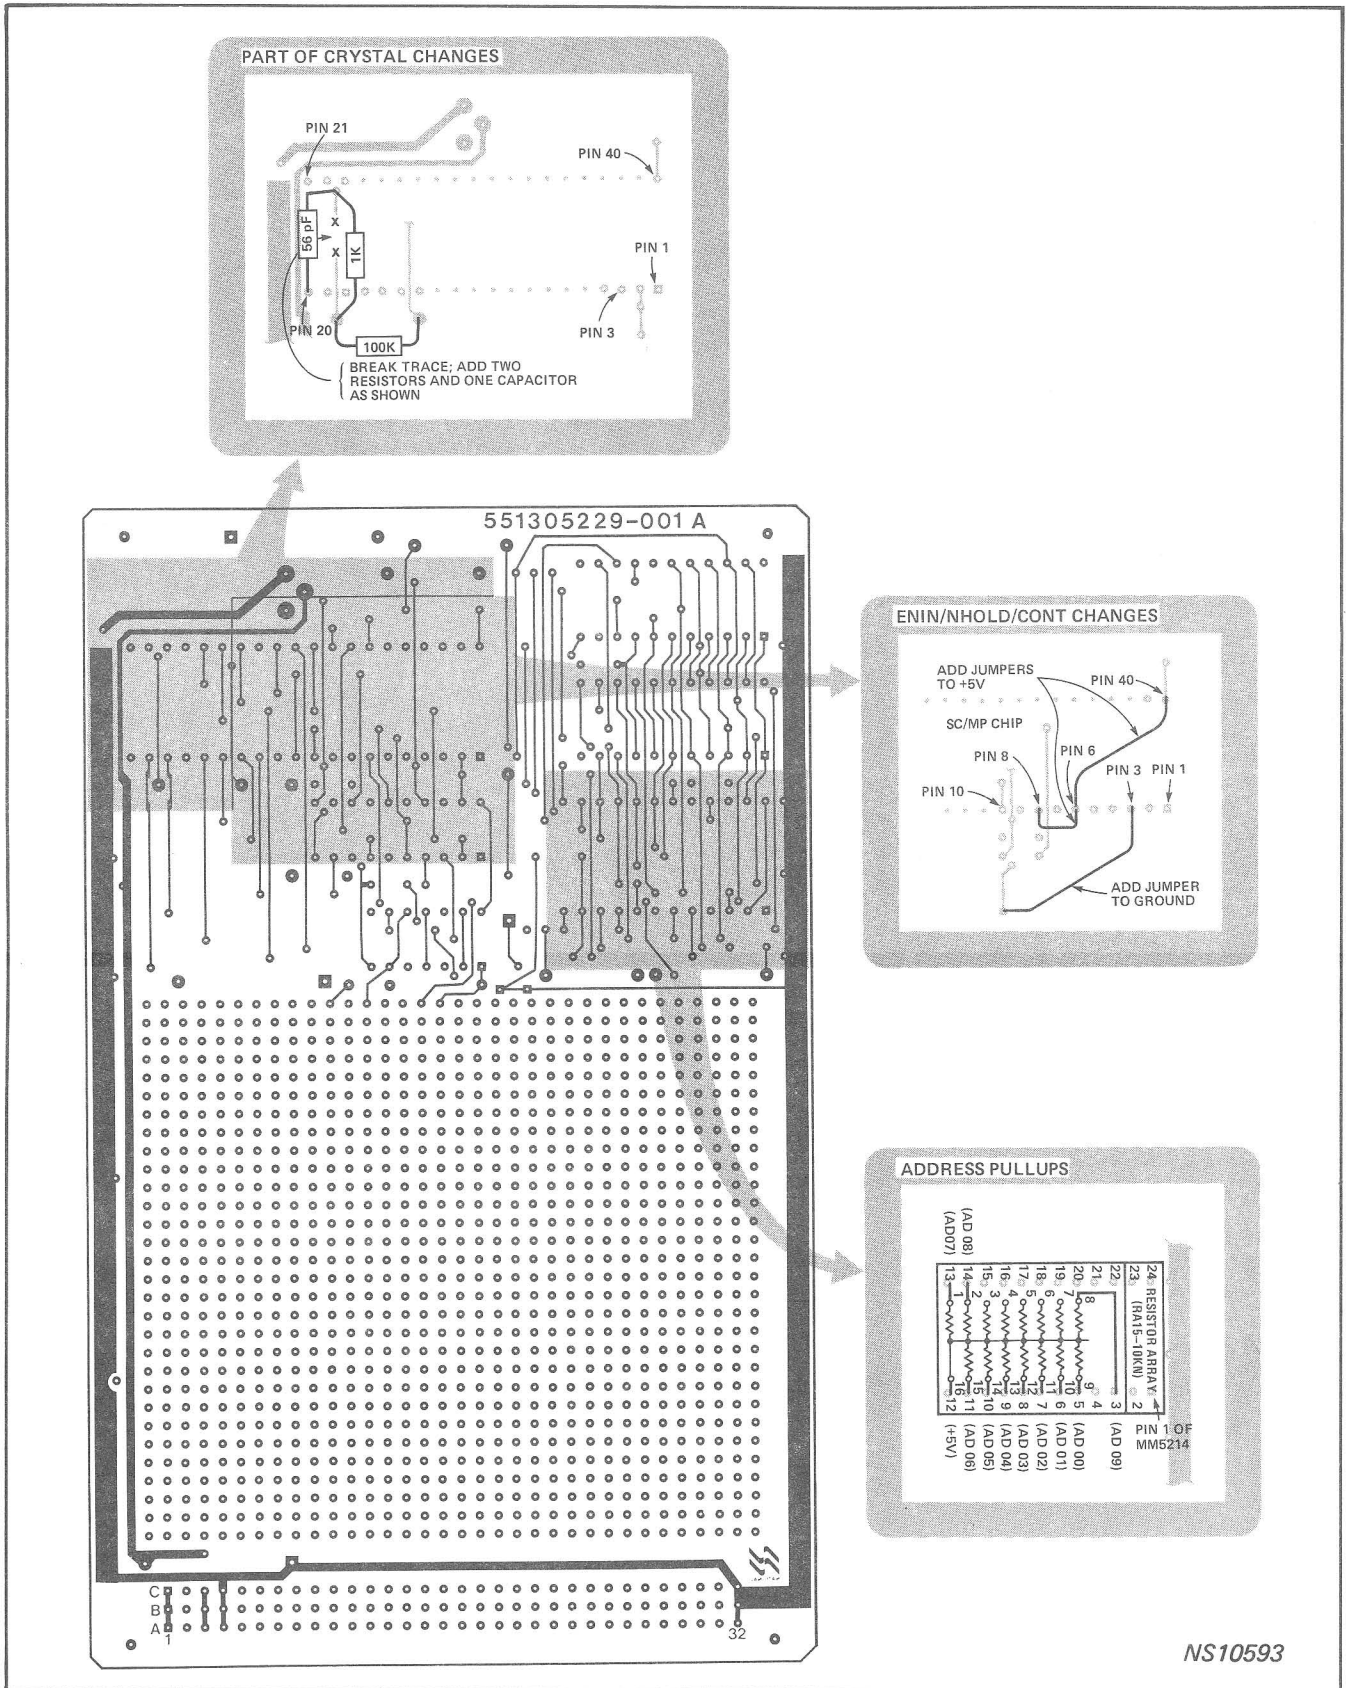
Retrofitting Solder Side of PC Board #551305229-001A for SC/MP-II Microprocessor Chip
